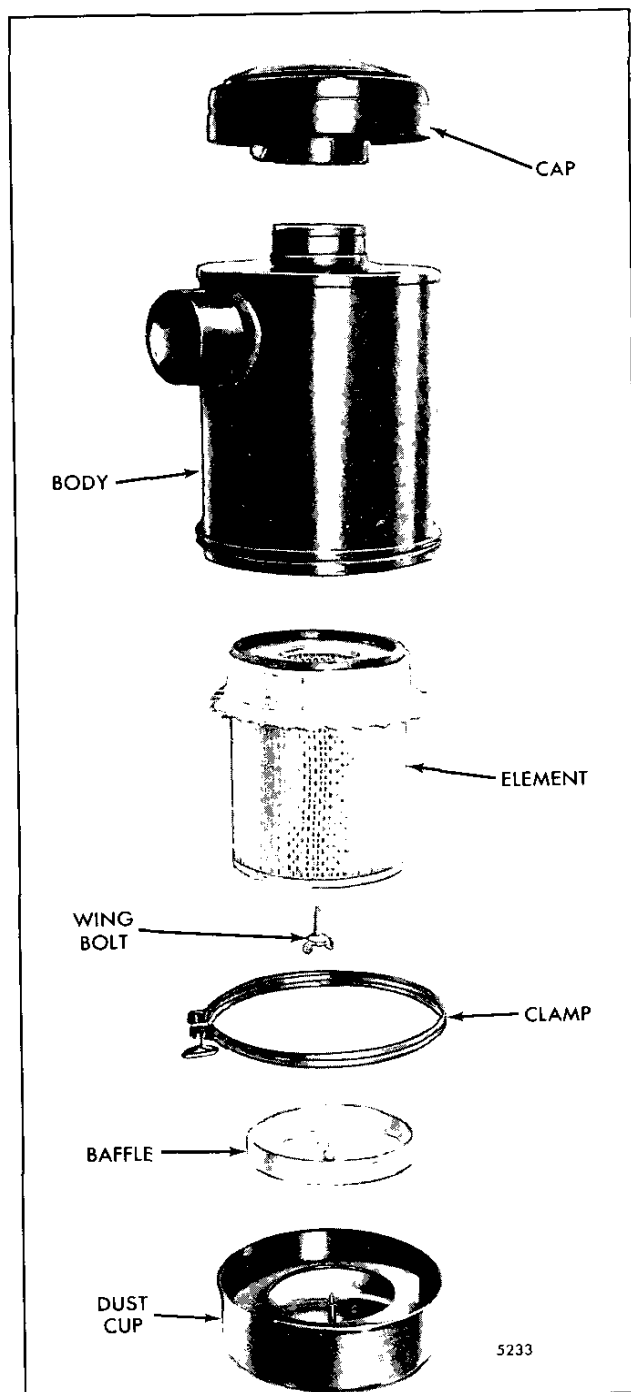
Dry Type Air Cleaner (Heavy Duty)
